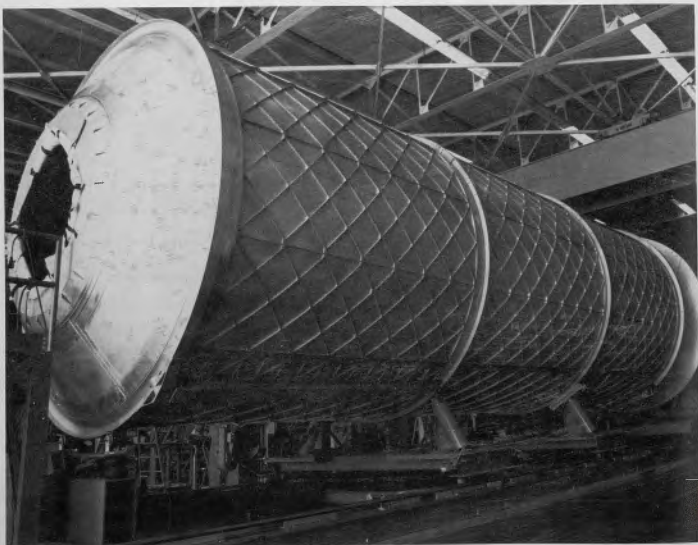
Prototype Of The American Space Station Common Module On The Girth Welding Fixture At NASA-MSFC, Huntsville, Alabama.
